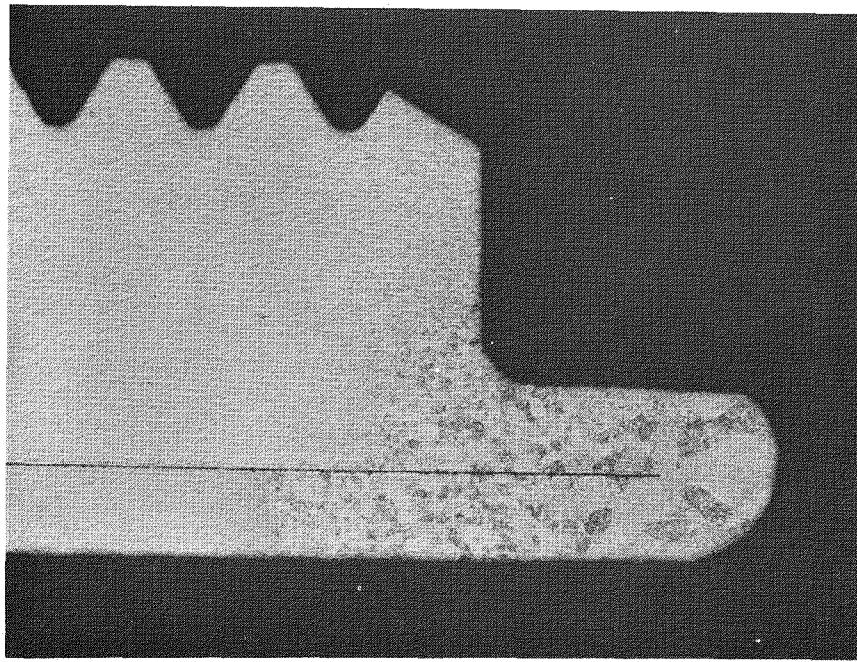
Section through Typical Blanket End-Closure Weld.
